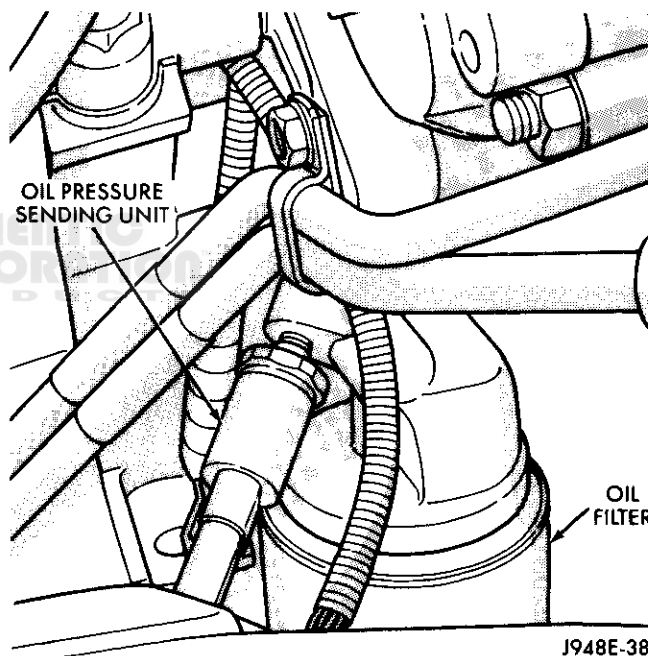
Oil Pressure Switch/Sending Unit - V-10 Engine
